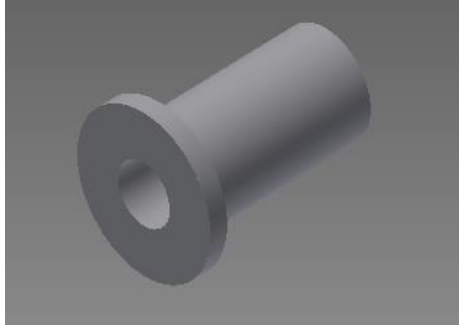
Sweeping mechanism pin. The CAD draft of the sweeping mechanism for D-Plate in the mechanical system.
